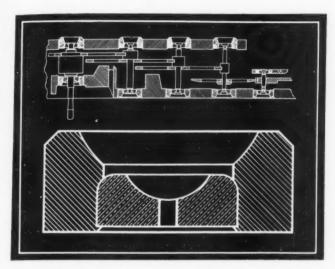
Profile sketch, top view, illustrates the relative positions of jewels in watch. Enlarged sectional view, below, shows jewel forced friction-tight into setting
